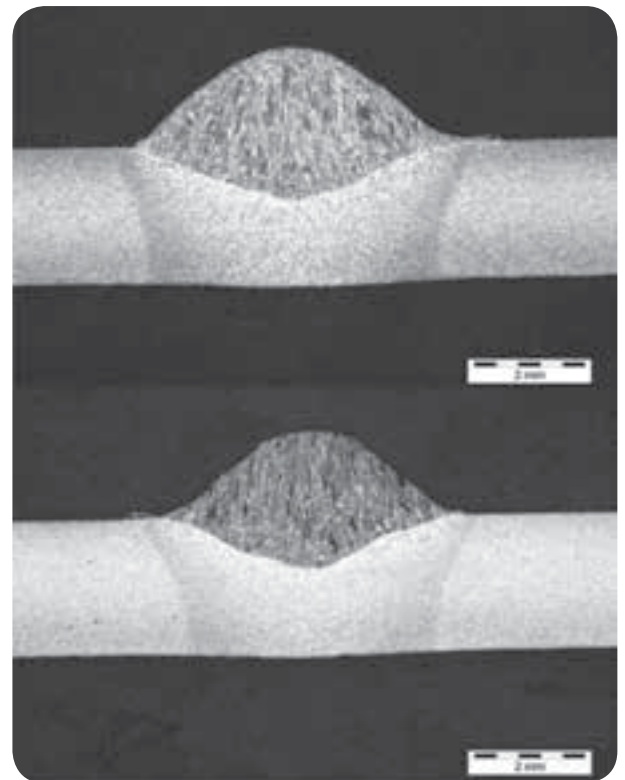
A comparison of macro section results for conventional GMAW weld (top); and the LSND process weld (below) for typical bead on plate sample welds.
